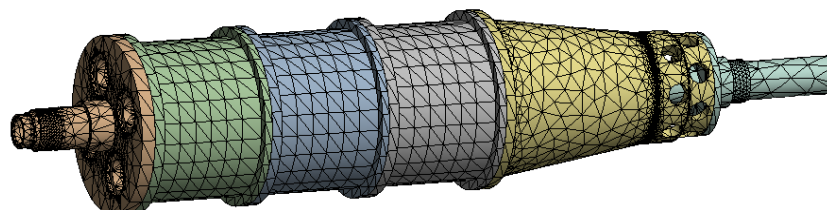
Conveyor with flights removed and mounted on the liquid and solids end hubs
